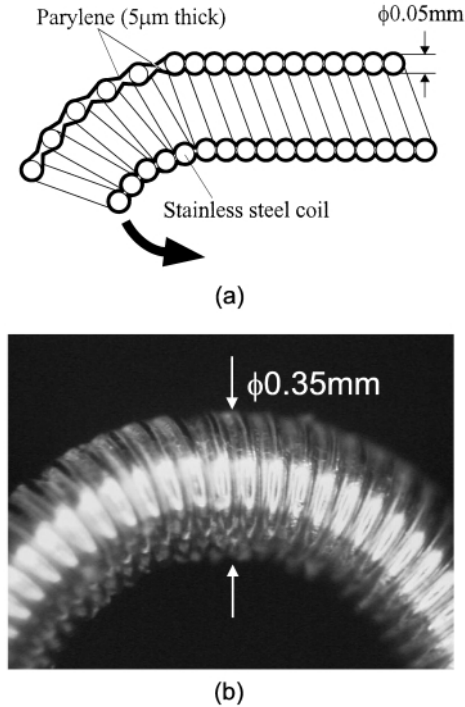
Coil spring with coated parylene on inner and outer sides. (a) Structure; (b) photograph.
